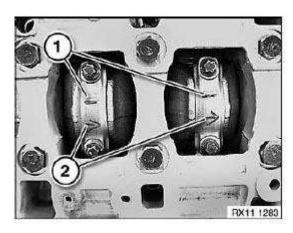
Cylinder Allocation Mark And Arrow Direction Courtesy of BMW OF NORTH AMERICA, INC.
